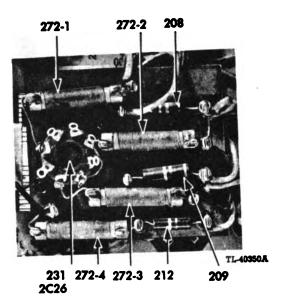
Trensmitter-Receiver RT-48A/TPX-1, transmitter chassis, resistor and r-f choke mounting board.
